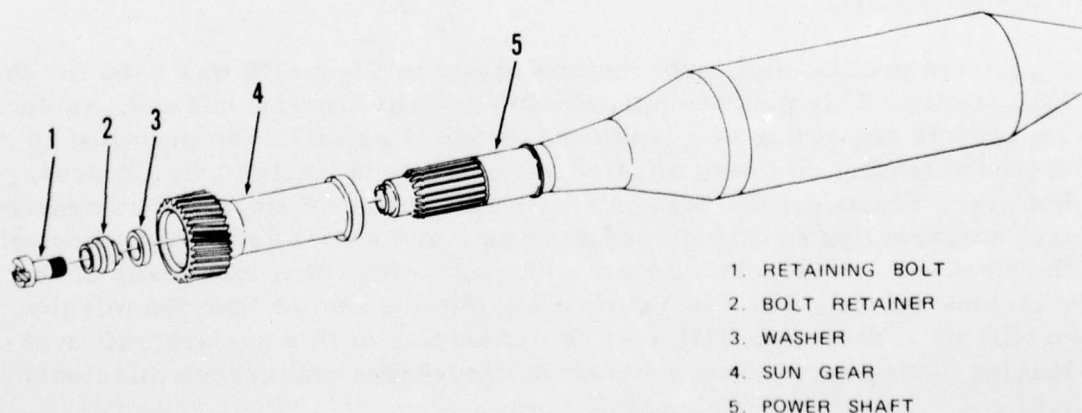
Sun Gear Retaining Bolt and Power Shaft Installation
